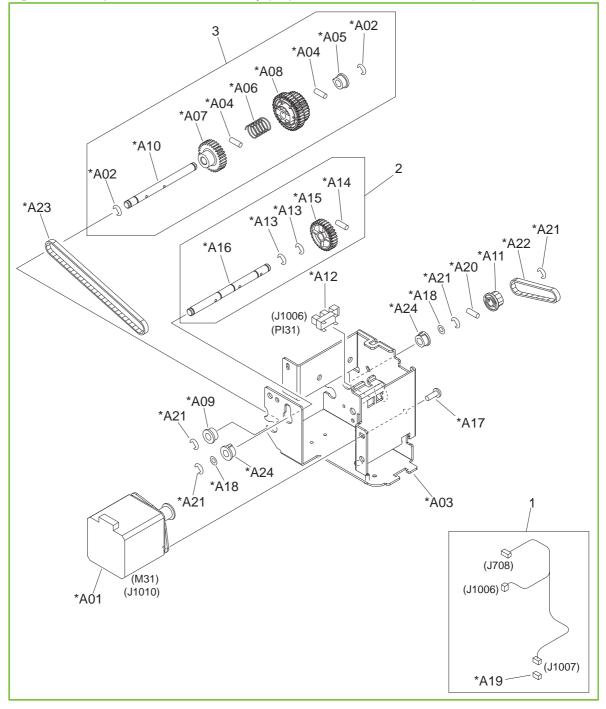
Paper-feeder motor assembly (stapler/stacker and booklet-maker)
